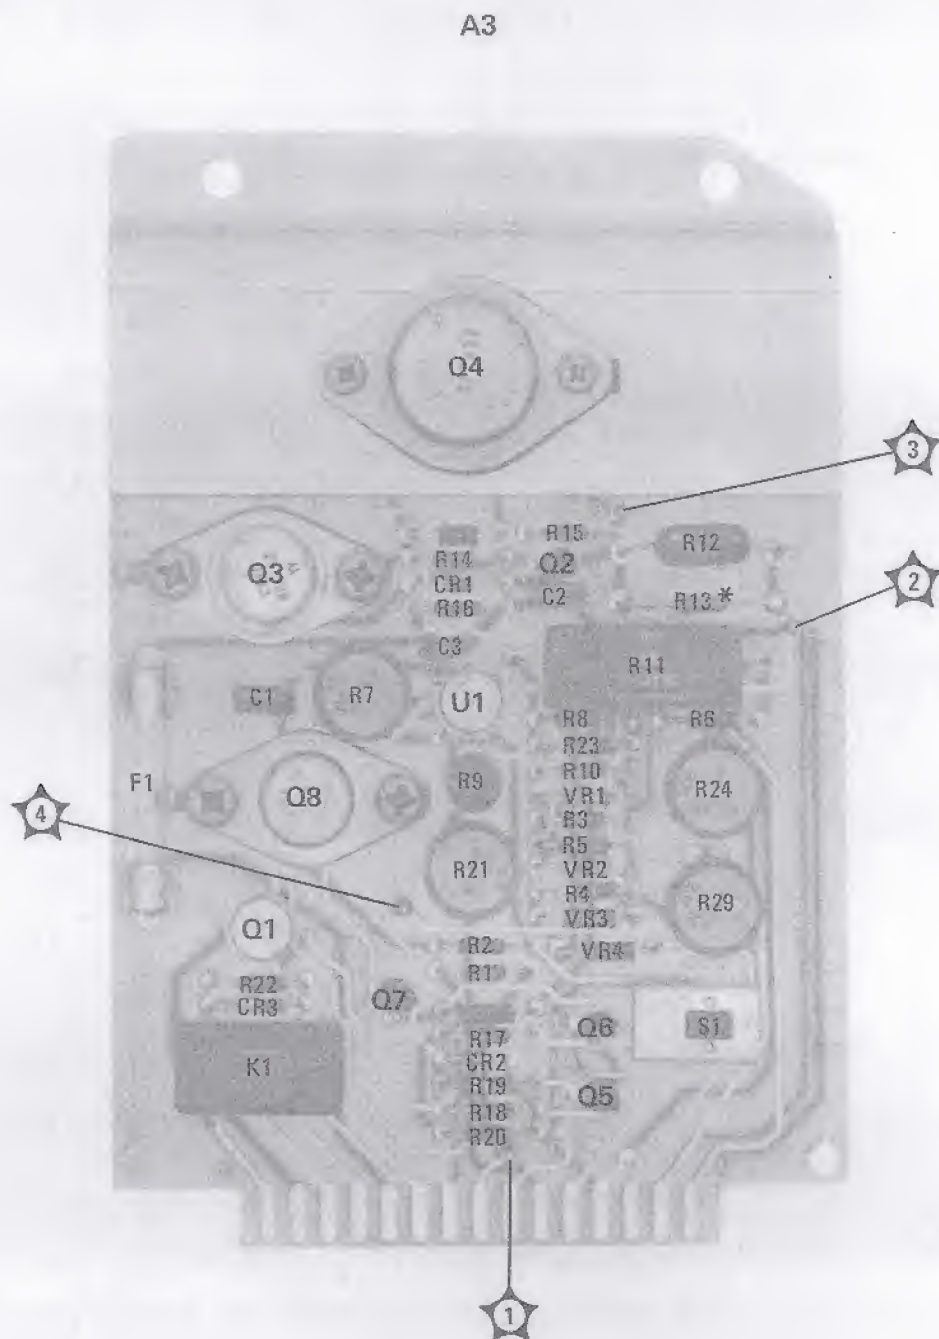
A3 YIG Driver Assembly Parts Locations (Figure 8-11) (Change C)
